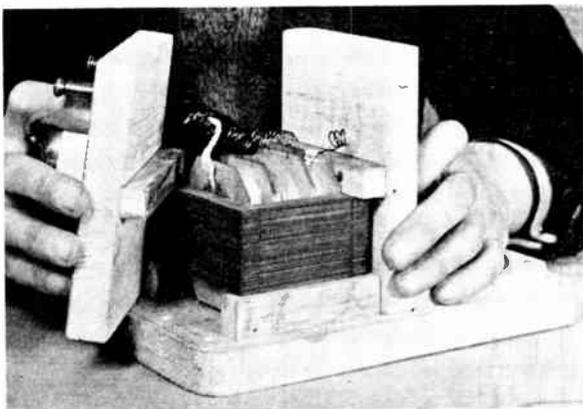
METHOD OF FIXING TRANSFORMER IN POSITION.
